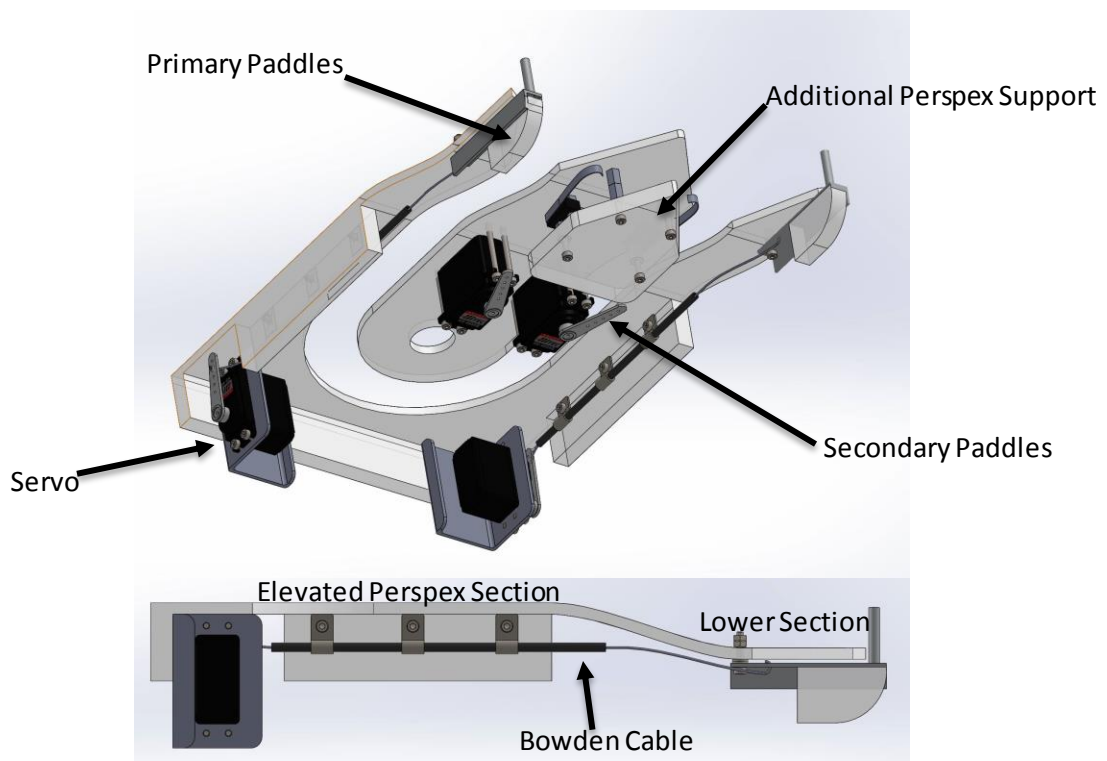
PADDLE COLLECTION MECHANISM ON "U" SHAPED TRACK
